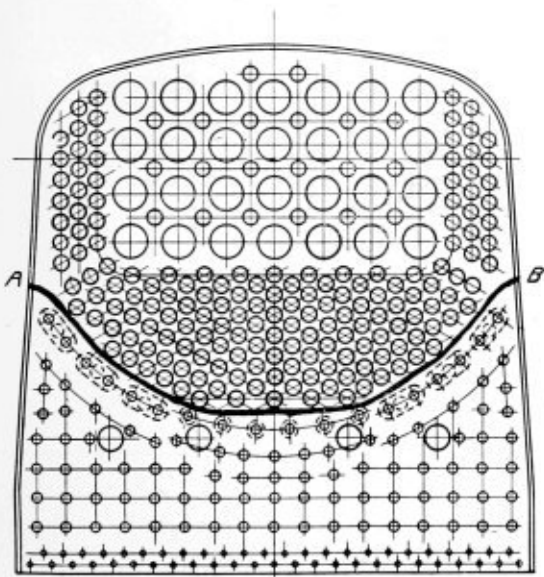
Wide Firebox Back Flue Sheet with New Top Portion
